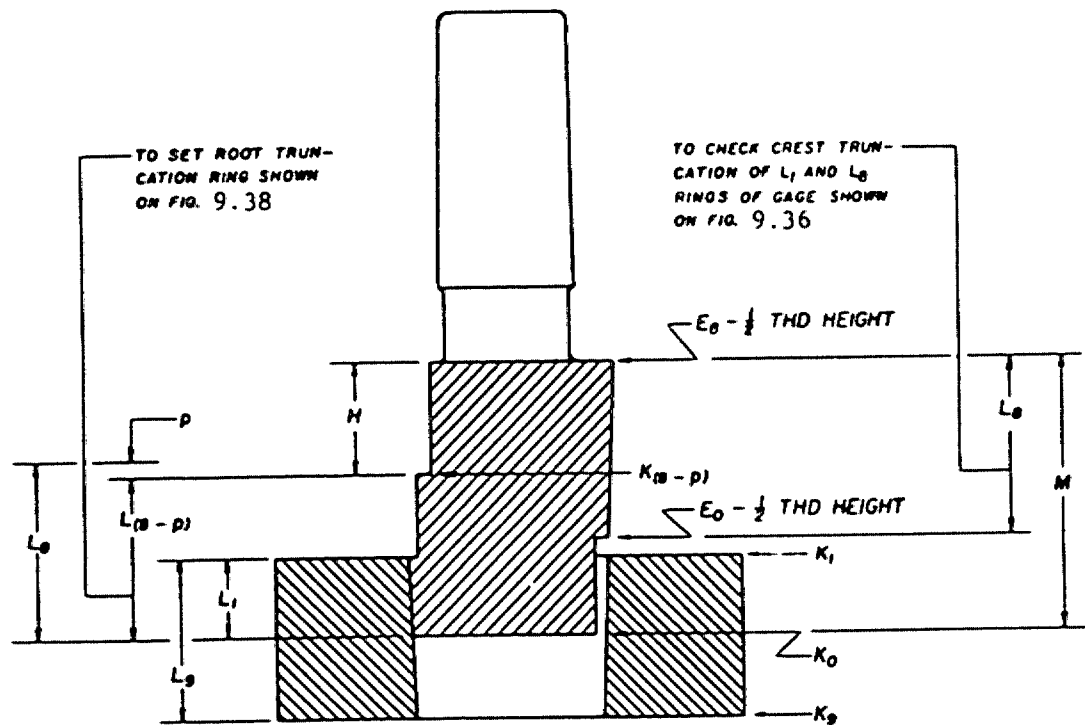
Master setting plug and ring gages for setting pitch diameter of threaded plug and ring gages; NGT, SGT.
